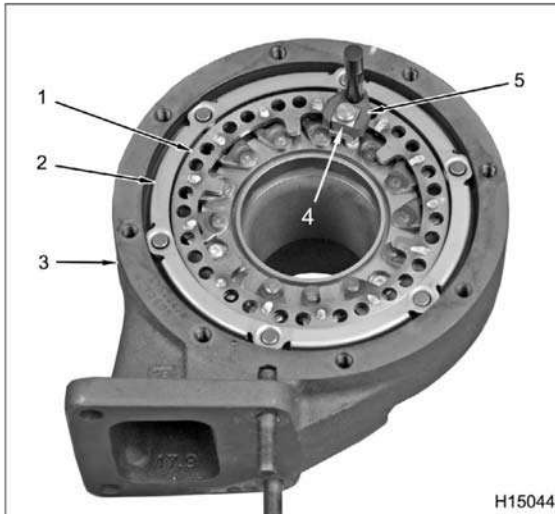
Removal of pivot shaft, outer ring, and unison ring
